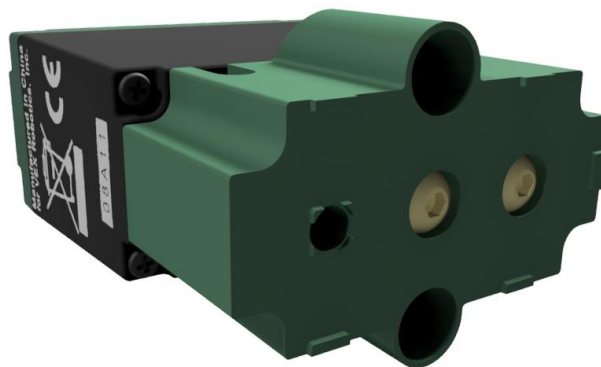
Access to the Motor Housing Screws is Preserved due to the Cut-out Corners
